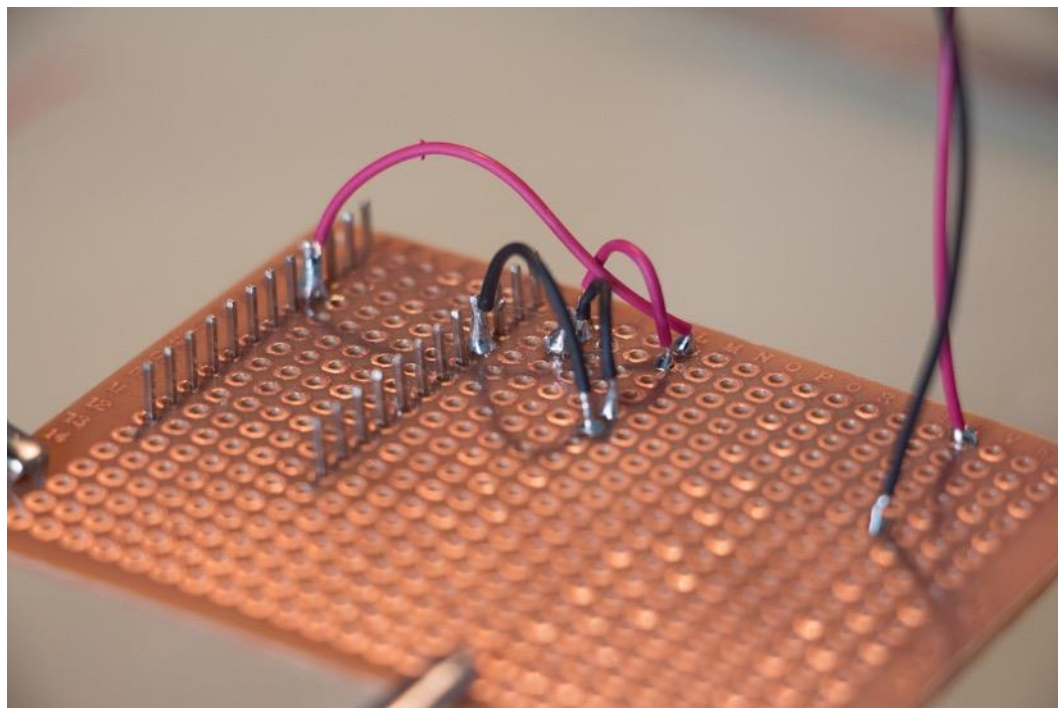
13 PCB Battery Test Bottom (own illustration)
